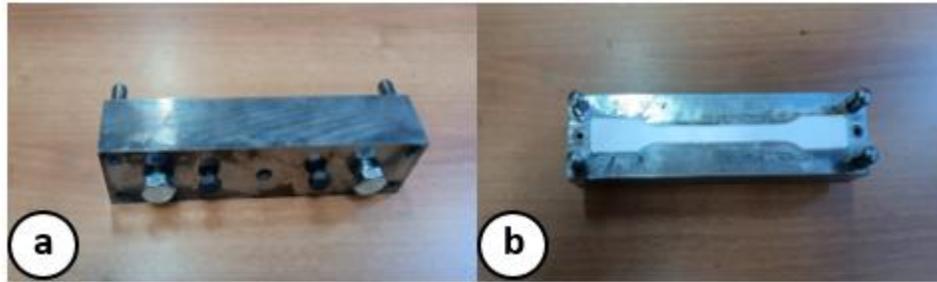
Produced a. Test Mold, b. Tensile Test Specimen
